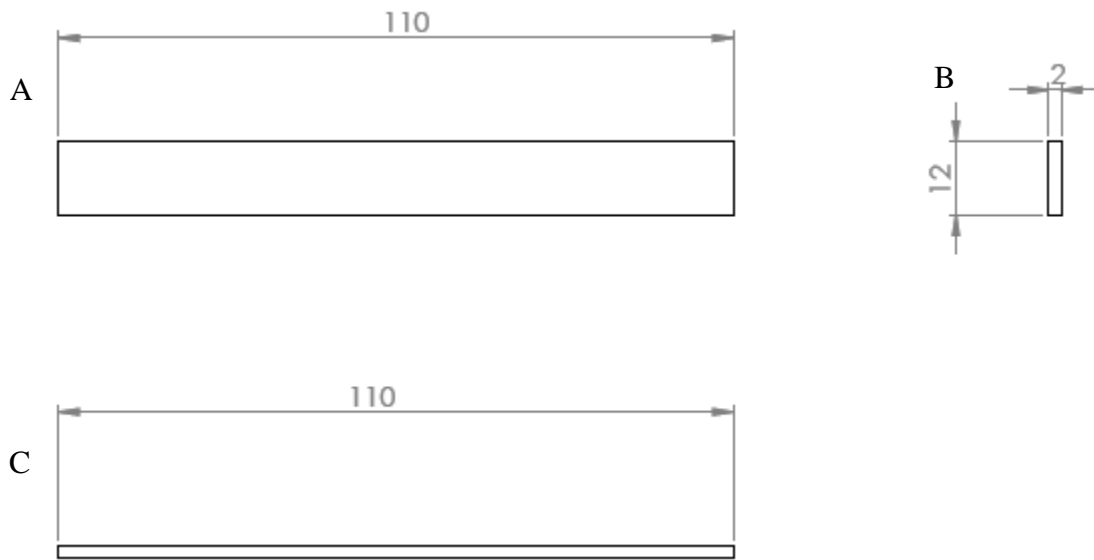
An acrylic moving plunger no. 2 drawing in mm scale, (A) front view, (B) side view and (C) top view.
